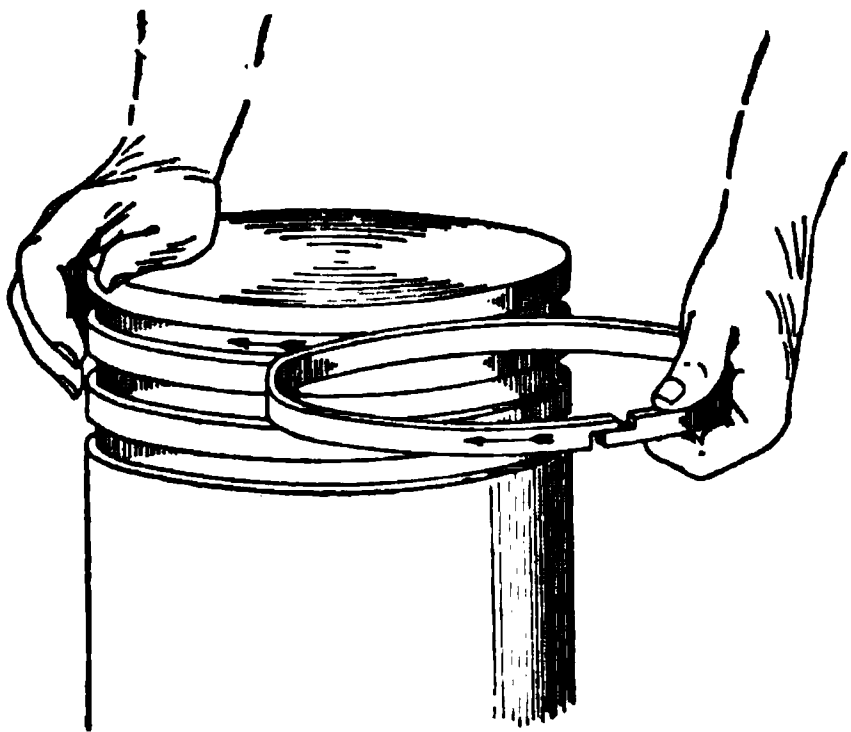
Starting Piston Ring in Groove to Test the Fit
